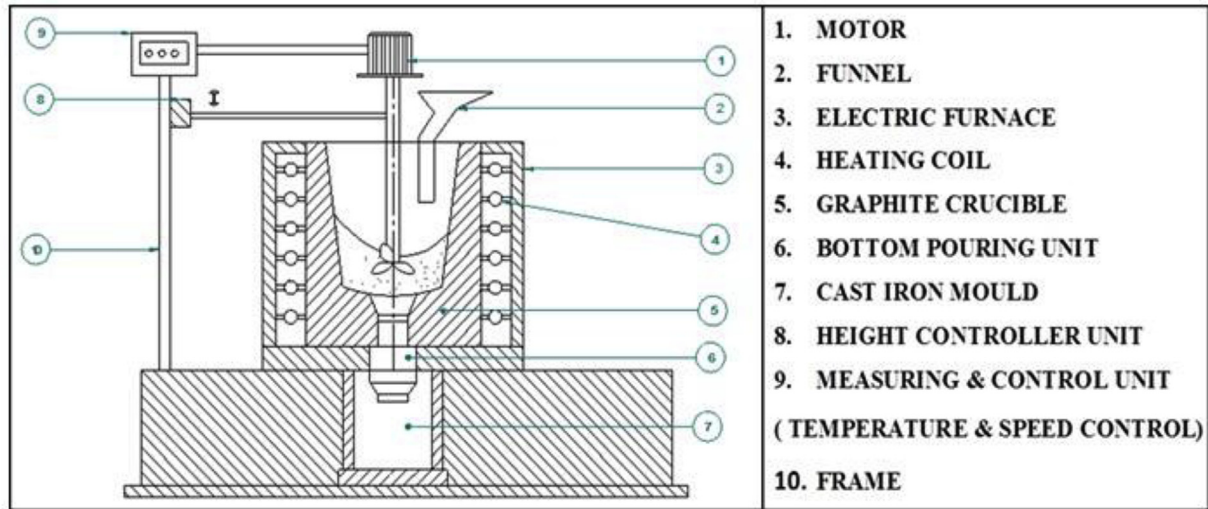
Stir casting Setup (Bottom Pouring Technique).
